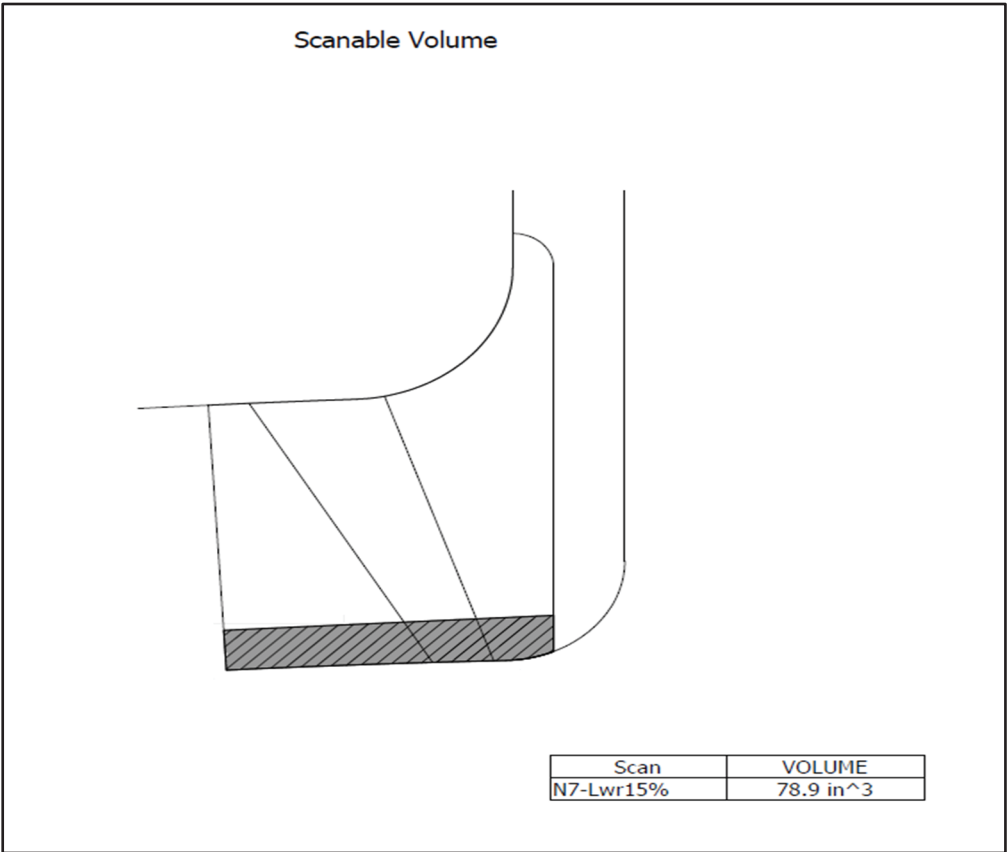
Weld N7-NV, Inner 15% Coverage Achieved
